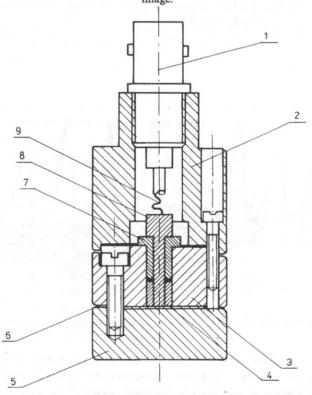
The design assembly drawing of the capacitance transducer. I — signal connector, 2 — metal housing, 3 — electrode holder, 4 — electrode reductor, 5 — metal front plate, 6 — metal foil 50  $\mu$ m thick, 7 — isolating tube, 8 — brass electrode, 9 — connecting wire.
